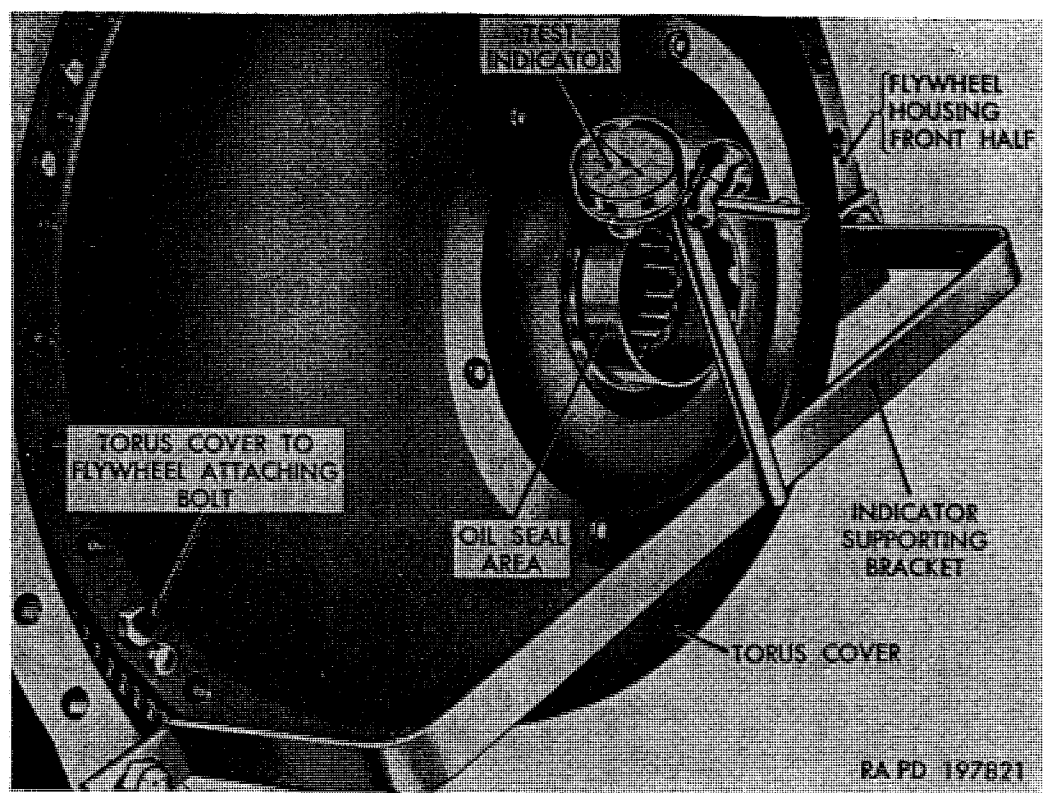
Checking torus cover runout, using test indicator and supporting bracket B7950331.
